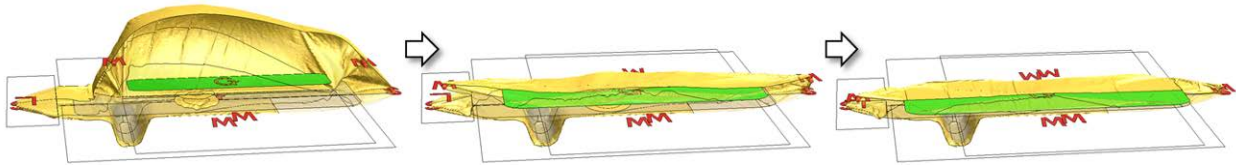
Step 5 – inner rollers used again to stretch the bag while pressure makes the last side tuck
